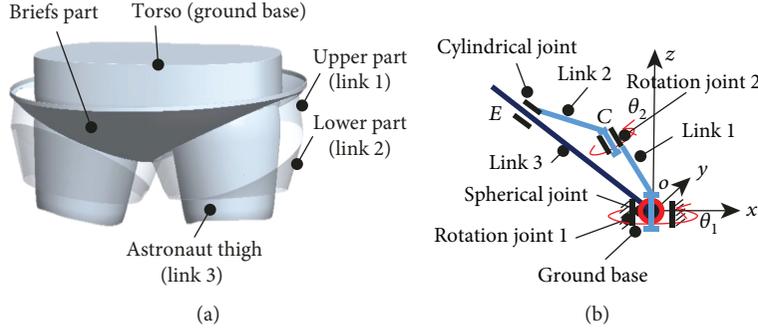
Models of (a) hip joint assembly (b) 3-linkage coupling mechanism.
